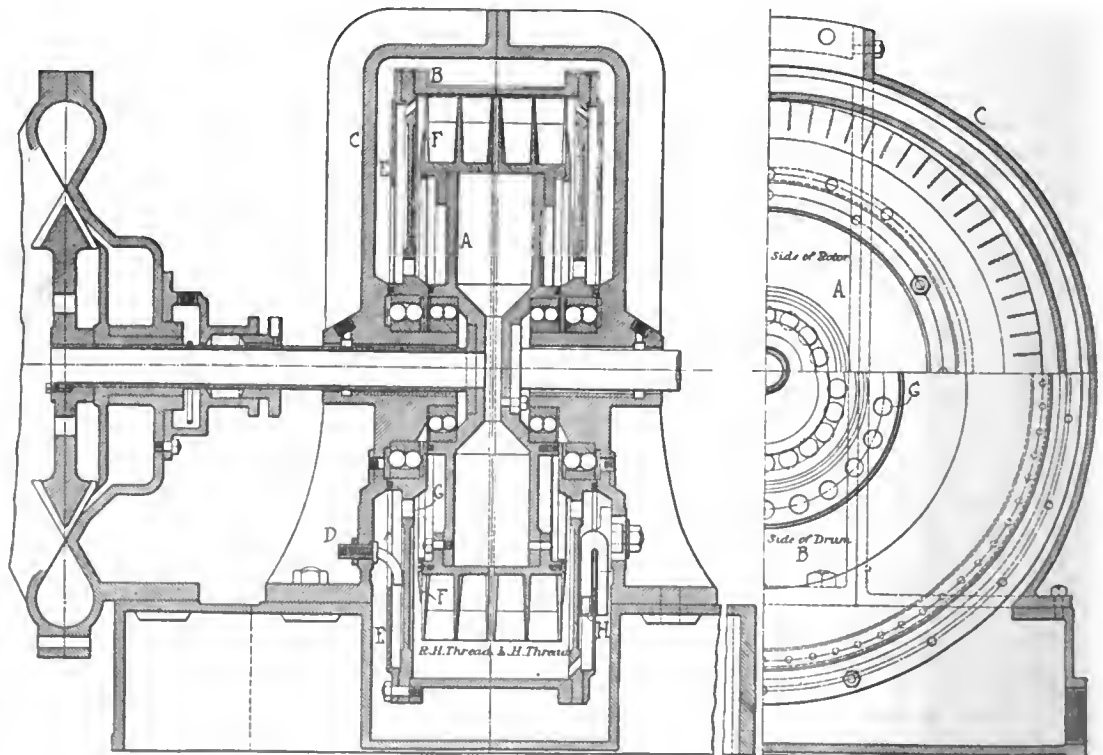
Longitudinal section of Globe-Johnston air pump and compressor, with air drier and cleaner at extreme left. Fig. 3—End elevation and cross-section
